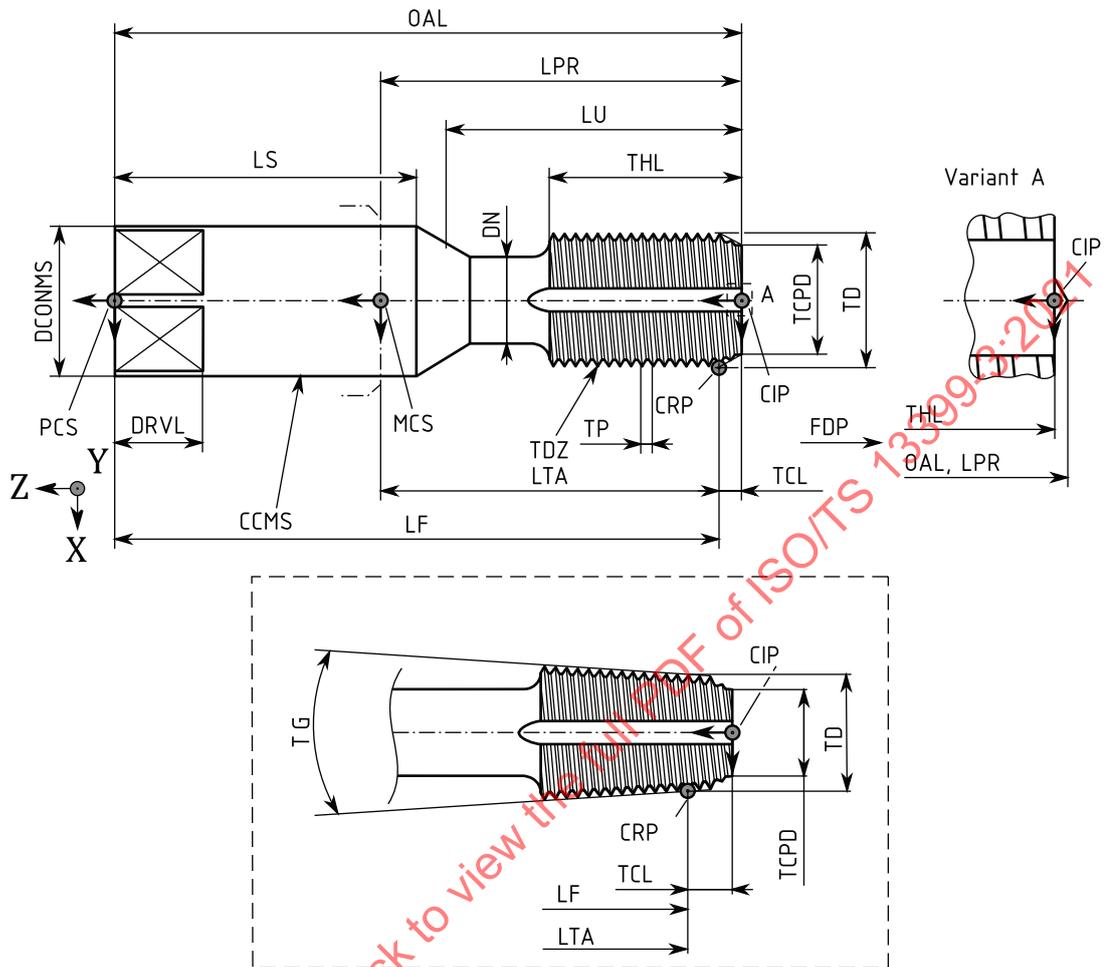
ISYC 301-04 - Thread forming tap with cylindrical shank and drive key, with neck
